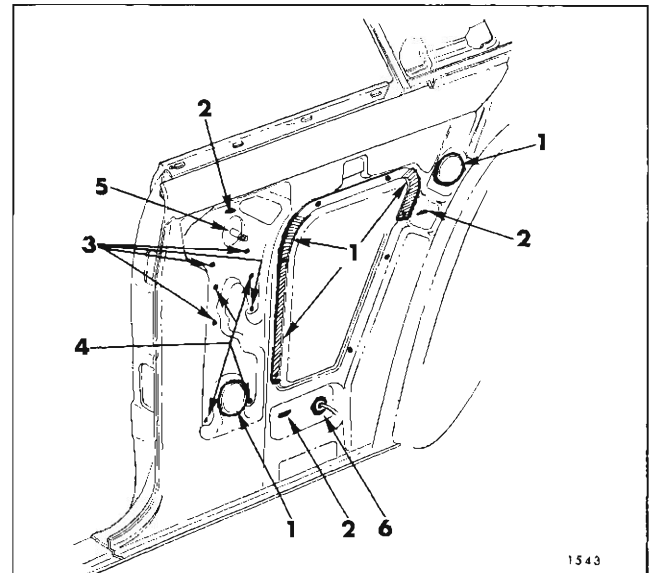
E11—Rear Quarter Inner Panel Sealing - "27" Styles
